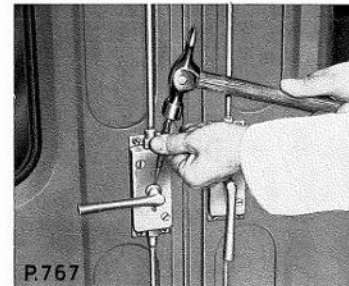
Tapping out the handle pin to remove the rear door interior handle as fitted to early models
